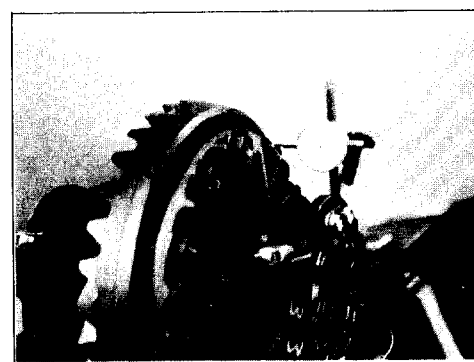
Measurement of Gear Bevel Back Surface Swing
